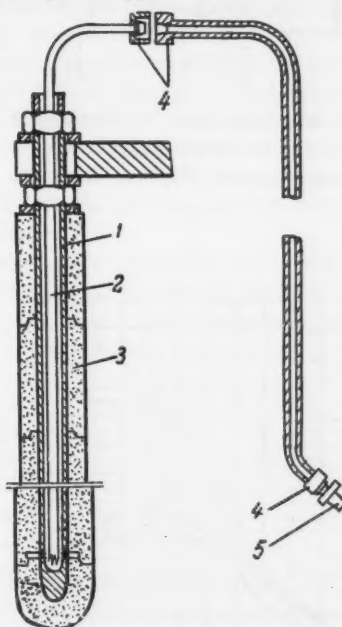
Diagram of cooled stopper. 1) Tubular rod; 2) tube through which compressed air is supplied to the stopper rod; 3) refractory stopper sleeves; 4) detachable union; 5) flexible tubing.
